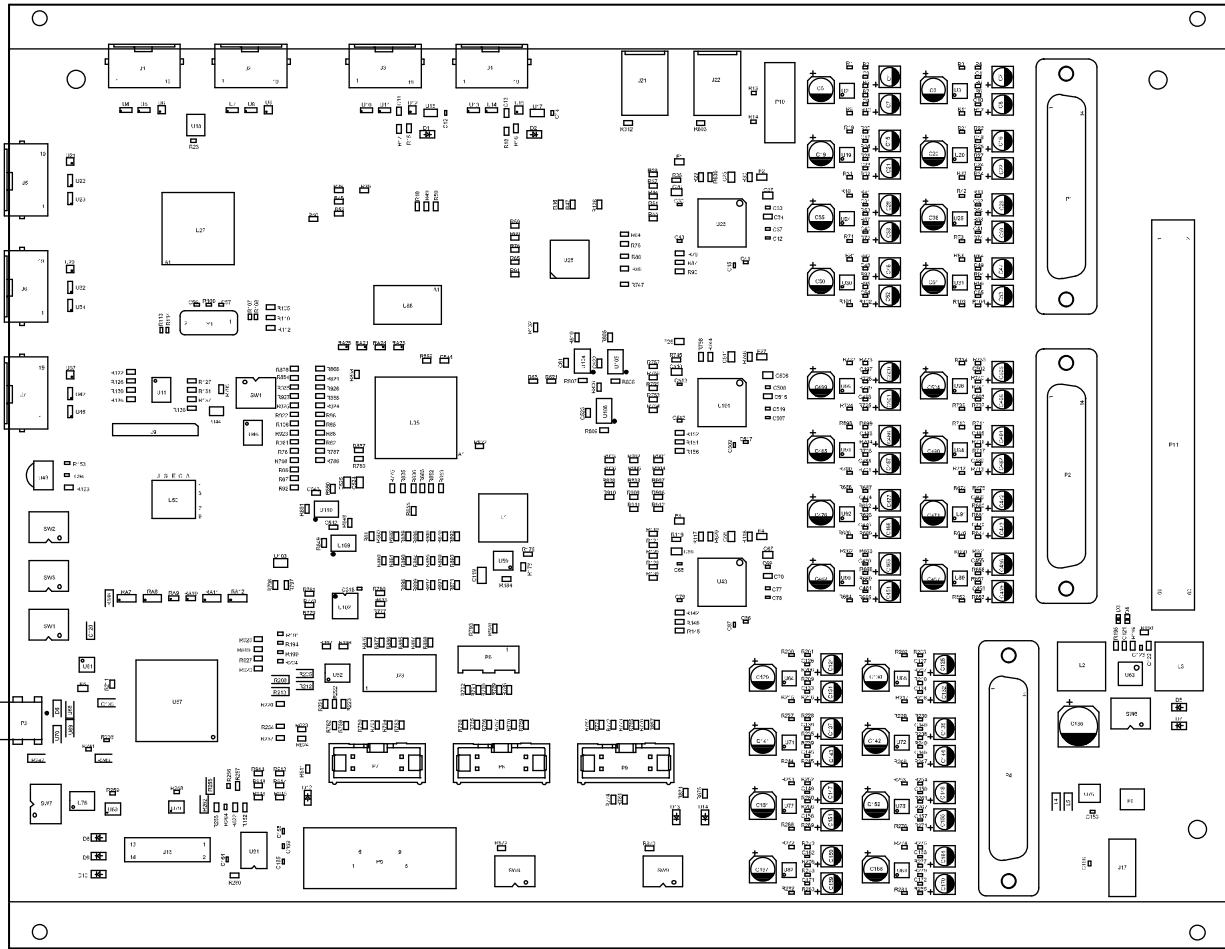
Assembly Drawing (Top Side) of the EVAL-MELODY-7 Printed Circuit Board (PCB)
